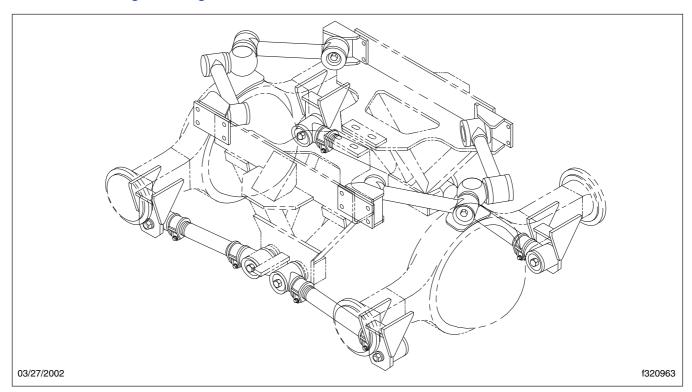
, Torque Rod Arrangement, 40,000-Pound Capacity Suspension
